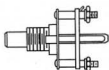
Switch Contacts (Sheet 2 of 2)
